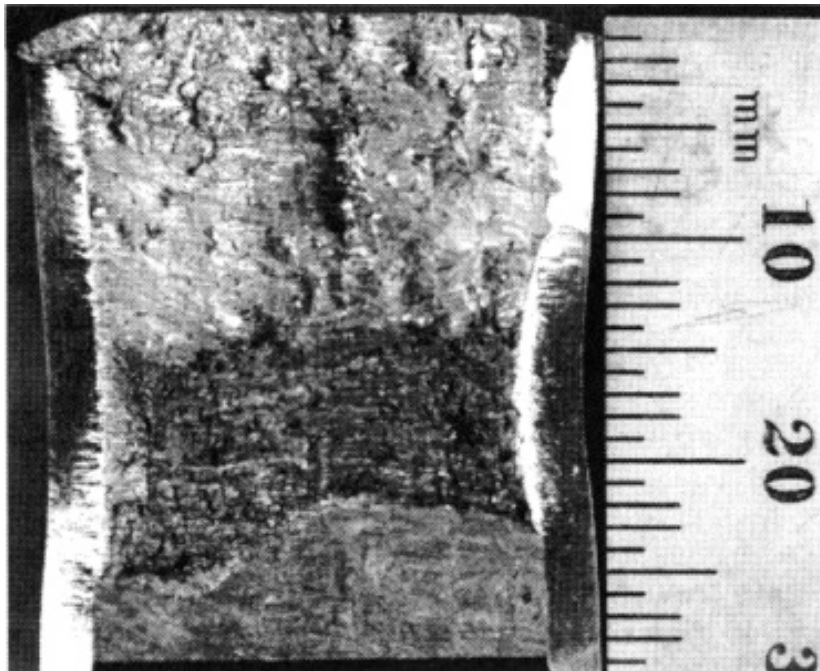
Fracture surface of aged weld metal PWCE tested at 25°C
